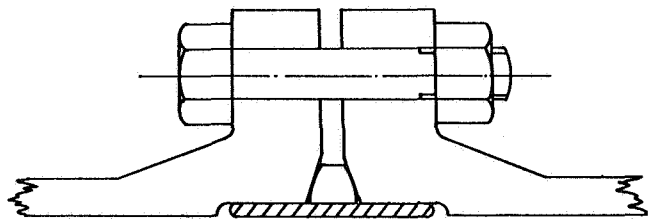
Addition of insulating pad between joint ring and pipe bore is remarkably effective.
